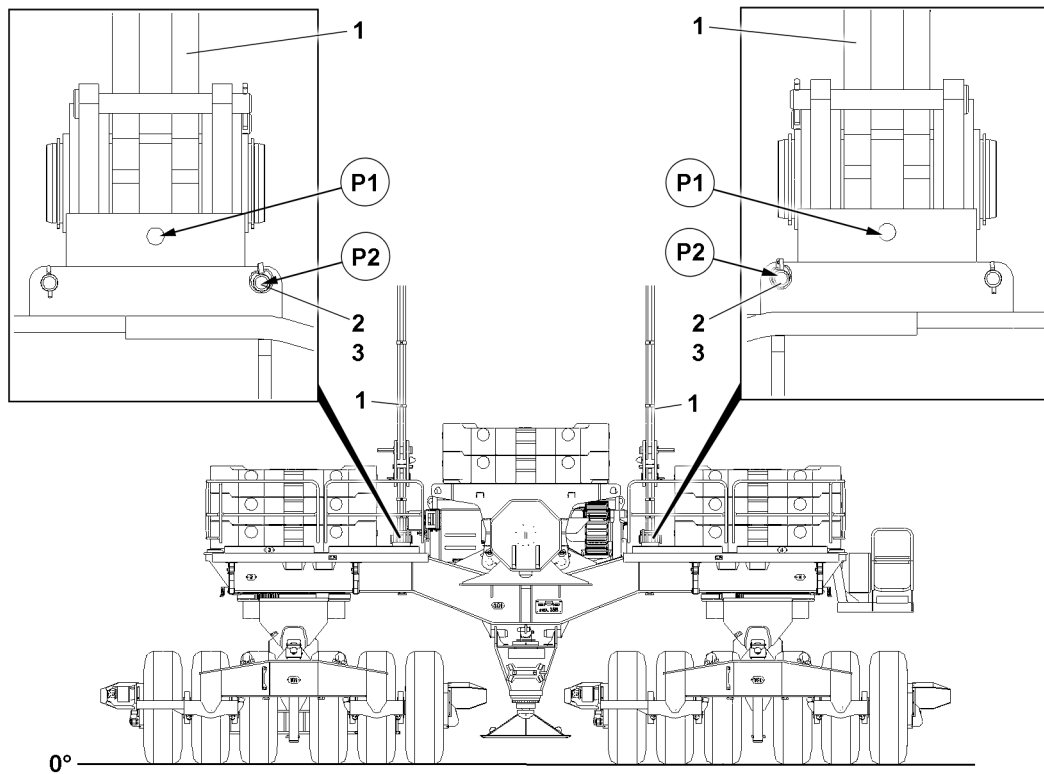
Disassembling the ballast trailer guying from the ballast trailer – Assembling the retaining element in the operating position
